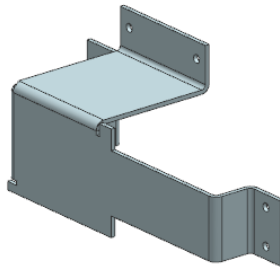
(b) Final sheet metal part displayed in trimetric view
